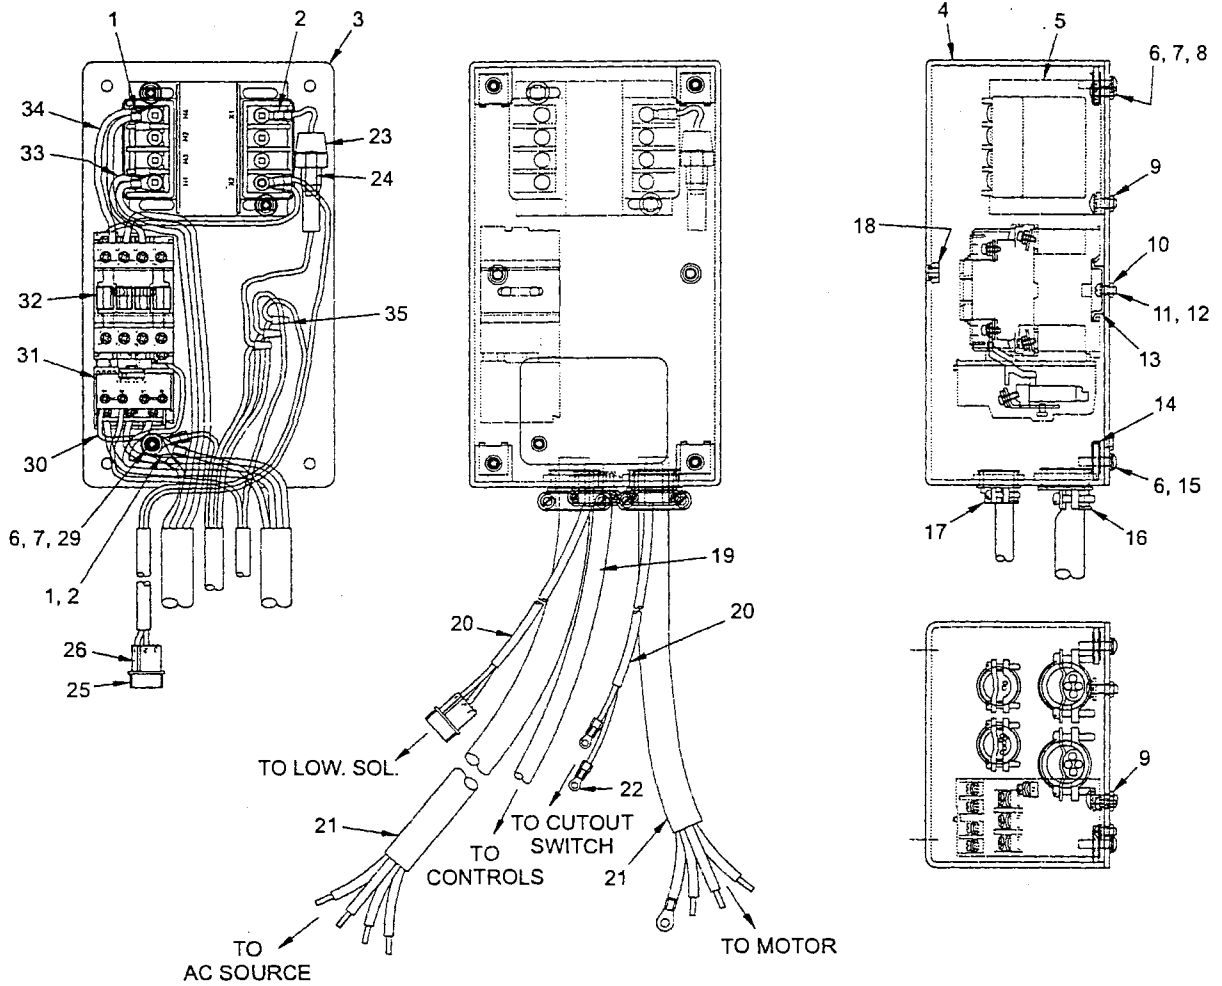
Electrical Box Assembly (36/48/60" Tables)
